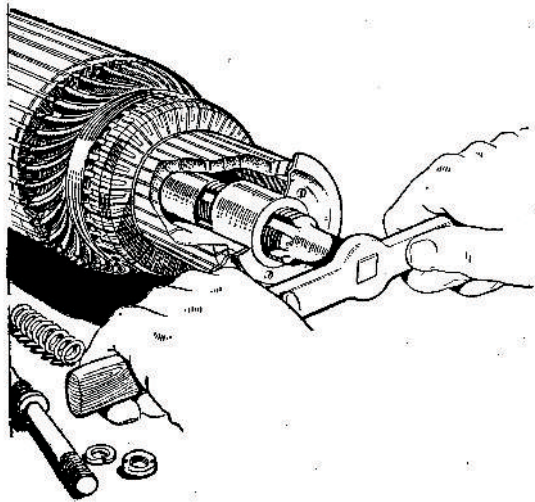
Extracting the C.A.V. Axial Starter Oil-less Bush.
